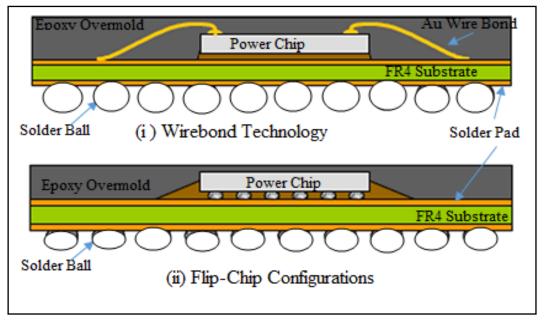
Wirebond and flip chip configurations of BGA solder joints. Source: (*Kim et al., 2008*)
